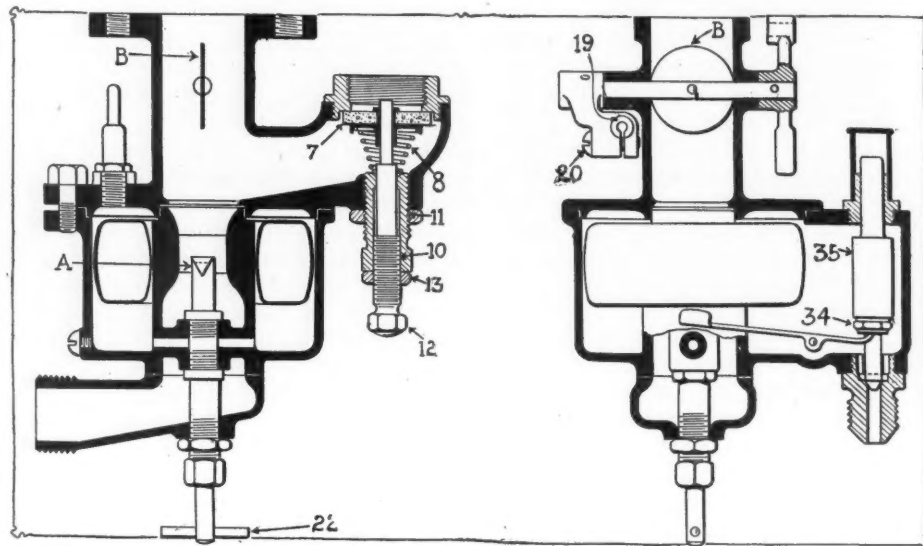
ADJUSTMENTS OF CADILLAC 1910 CARBURETER
